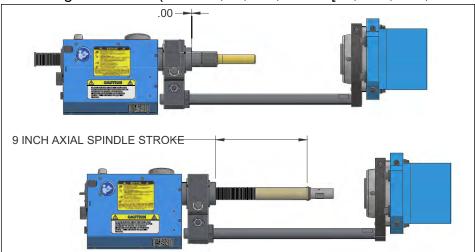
BW2600 AXIAL STROKE DISTANCE SHOWING 9" AXIAL SPINDLE STROKE (LOWER)
